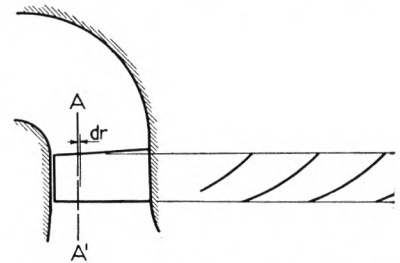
AXIAL ARRANGEMENT OF BLADES
